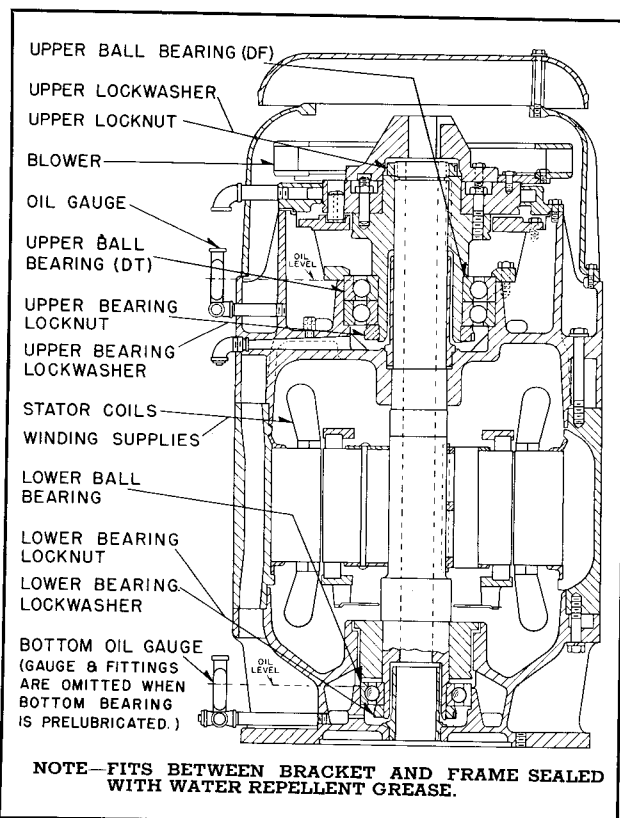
Motor A.C. Frames 444 thru 8120—Hollow or Solid Shaft-Type "CSP" Fan-Cooled or Explosion-Proof
